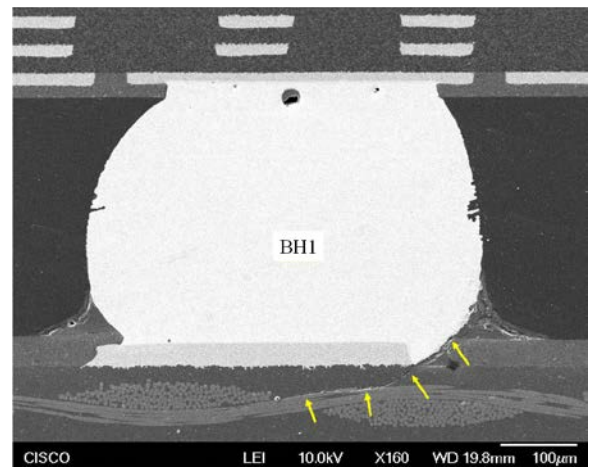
Crack in the intermetallic layer of the solder ball BK51 in board # 83
